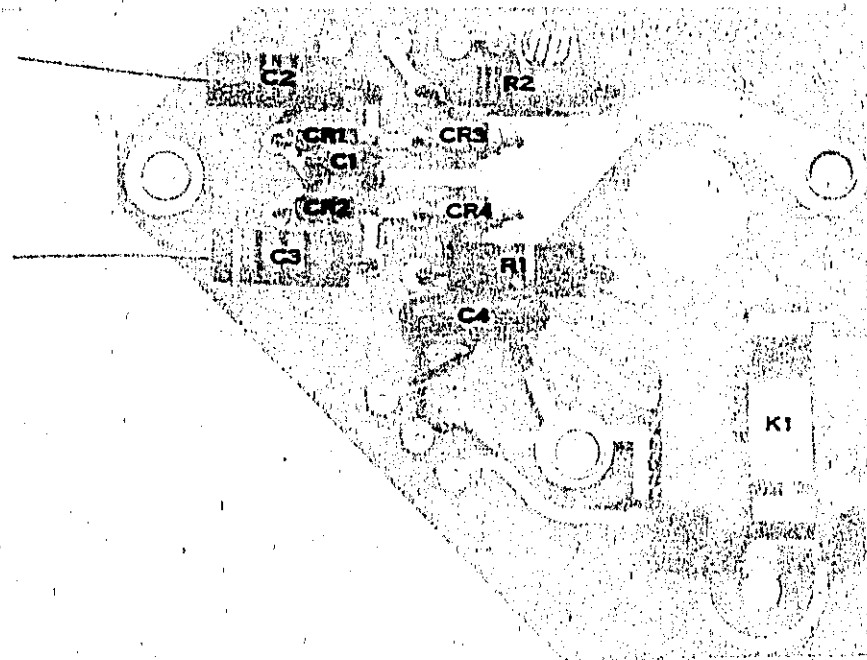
Etched Circuit A5 Varactor Control Assembly Component Locations
